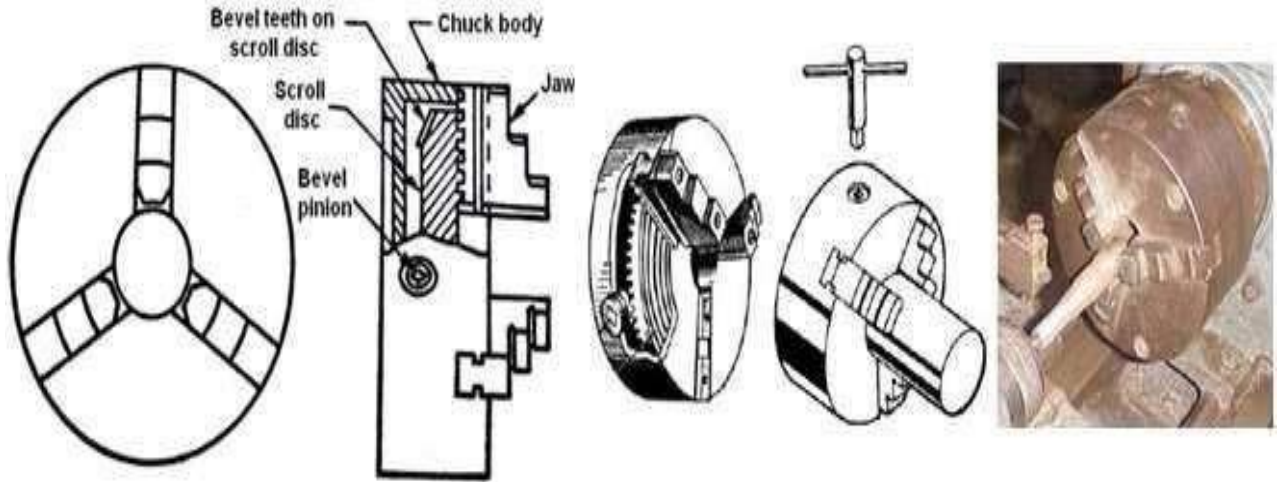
(a) 3-jaw self centering chuck or universal chuck
